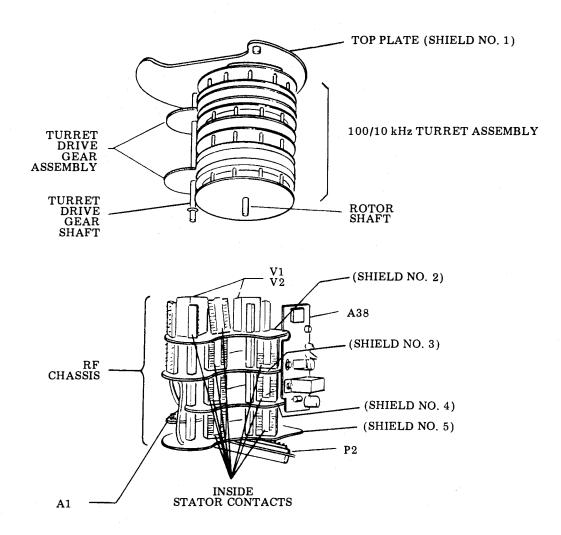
RF Amplifier Assembly A2A4, RF Chassis and Turret Assembly, Disassembly Parts Location
